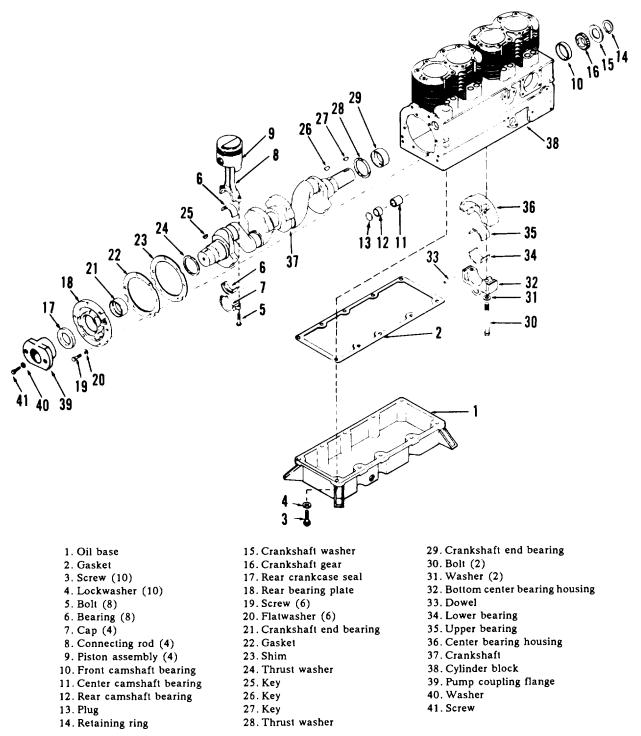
Crankshaft, Pistons, and Connecting Rod.
